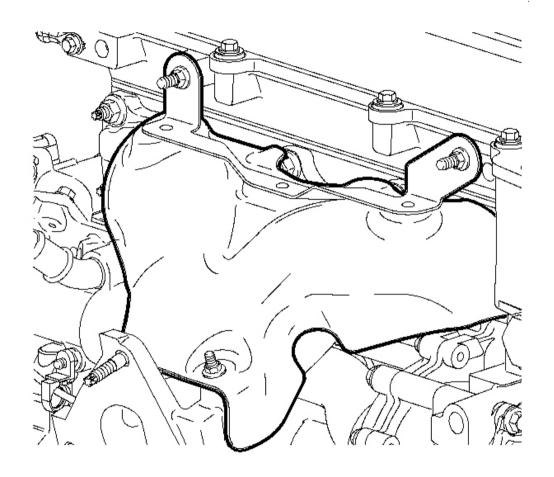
View Of Exhaust Manifold Heat Shield Courtesy of GENERAL MOTORS CORP.
